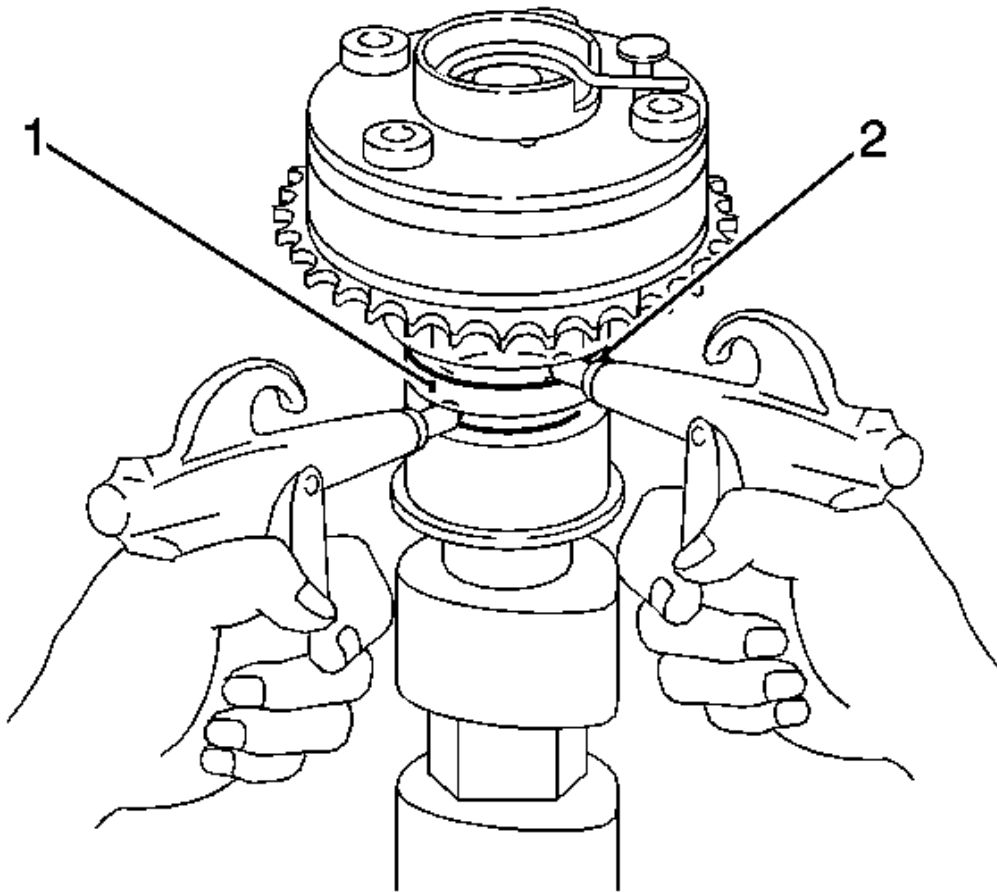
View Of Sprocket Assembly Cleaning With Compressed Air
